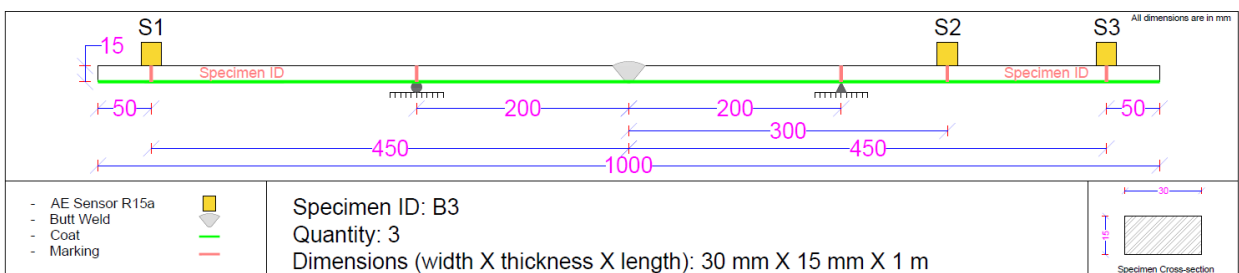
Specimen B3 Marking and sensors location from the centre of the weld
